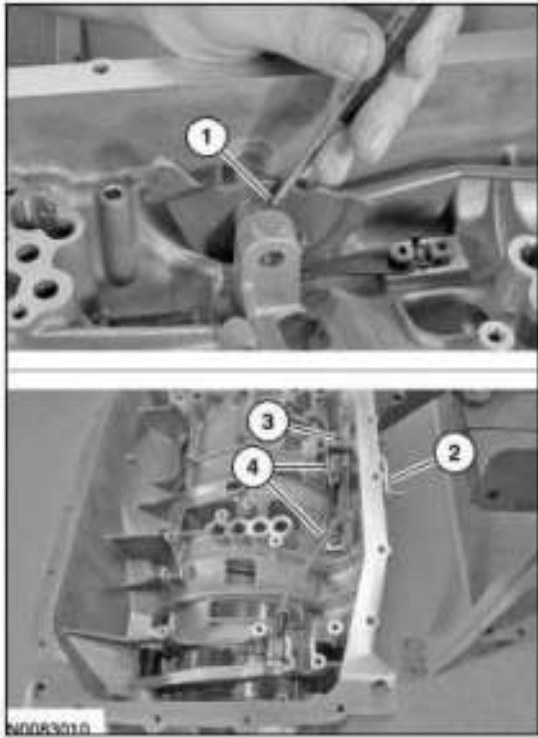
Removing Manual Control Lever Detent Plate And Park Pawl Actuator Rod
